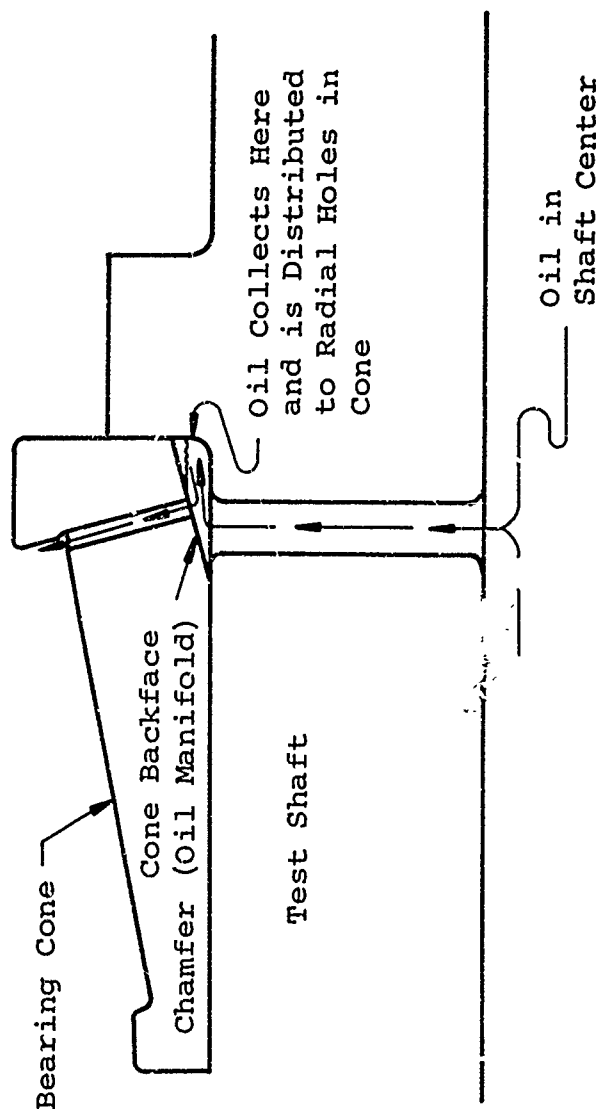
Line Diagram Showing Lubricating Oil Collecting at Top of Cone Backface Chamfer to Distribute Oil to the Radial Holes to the Large End Rib.
